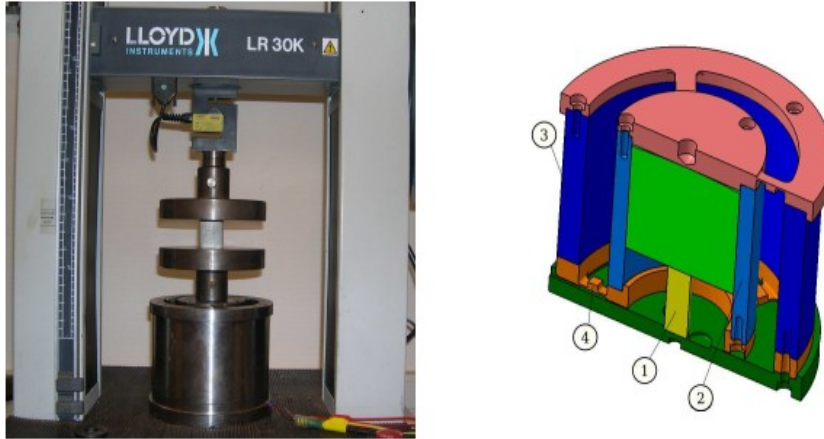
(a) Lloyd machine with special setup for generating vibration during upsetting process, (b) Detail of mechanical vibration assembly R. Ly et al., (2006-2010) [30, 31, 33 and 34].
